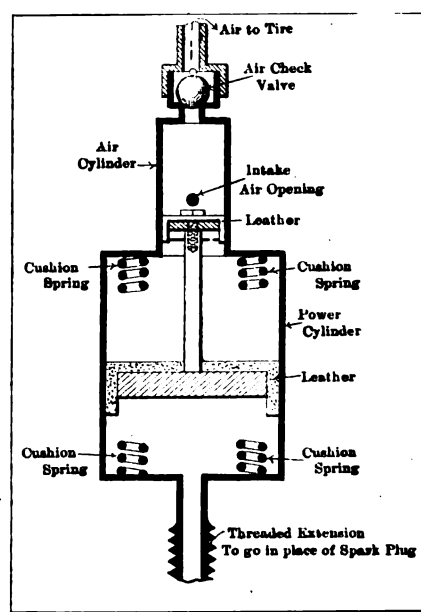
Cross-section of the pump, showing the connection between the power and air pistons and the buffer springs
